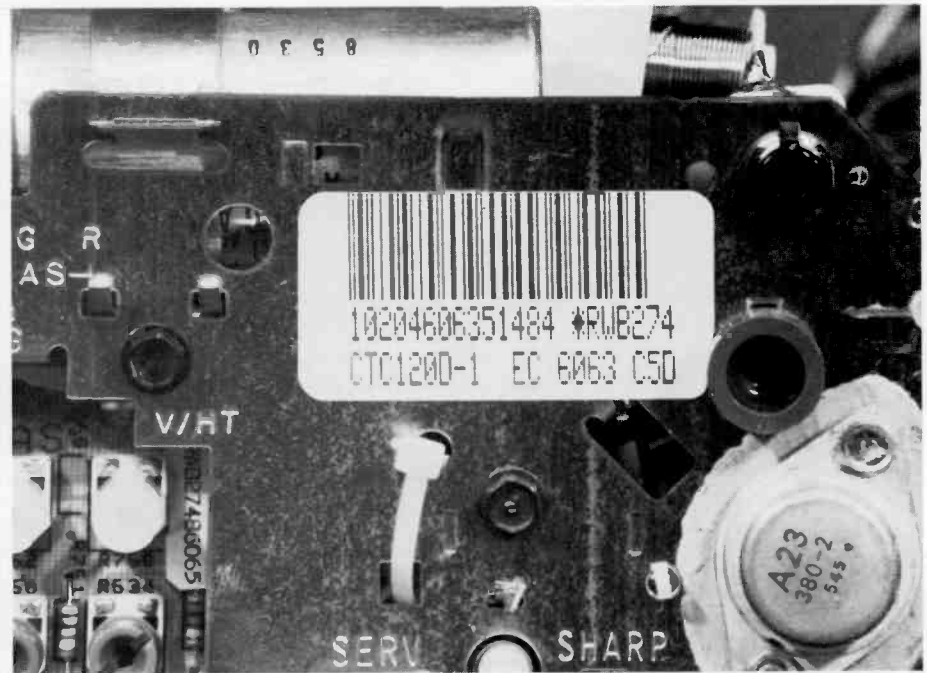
Each chassis has a unique bar-coded label identifying the chassis model, assembly line, and production date and shift.
